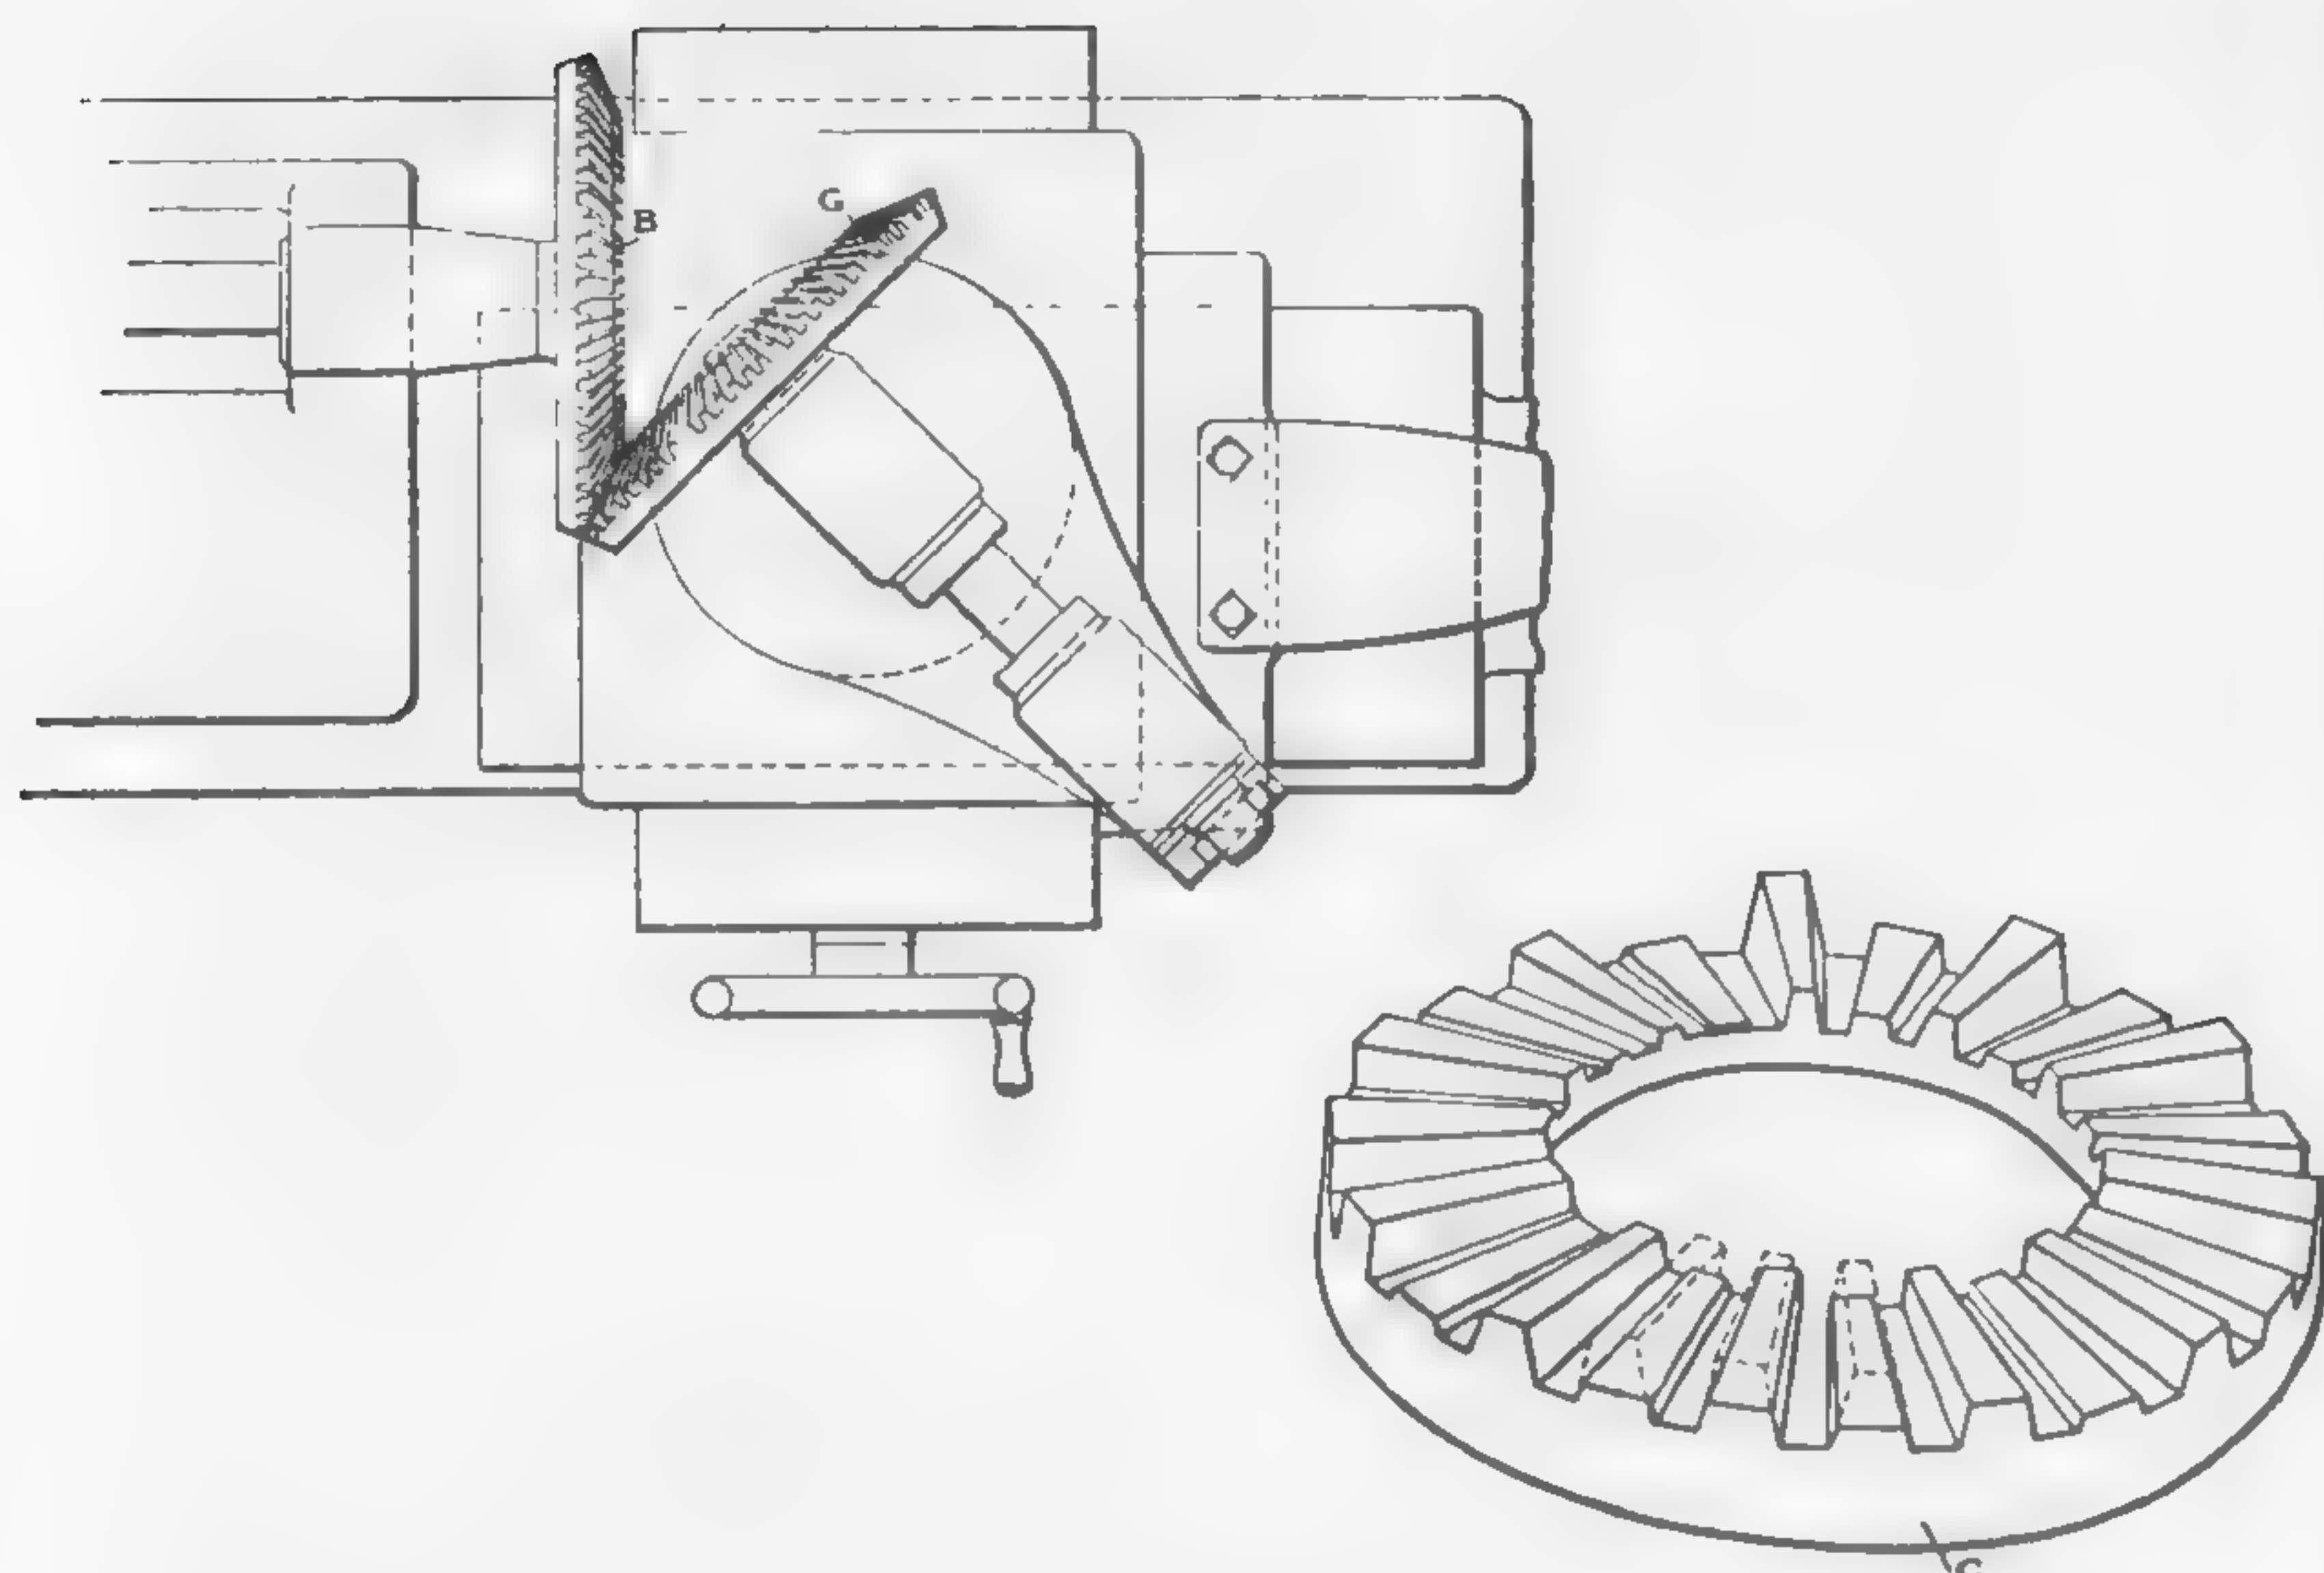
BEALE'S IMPRESSION MACHINE, 1899
